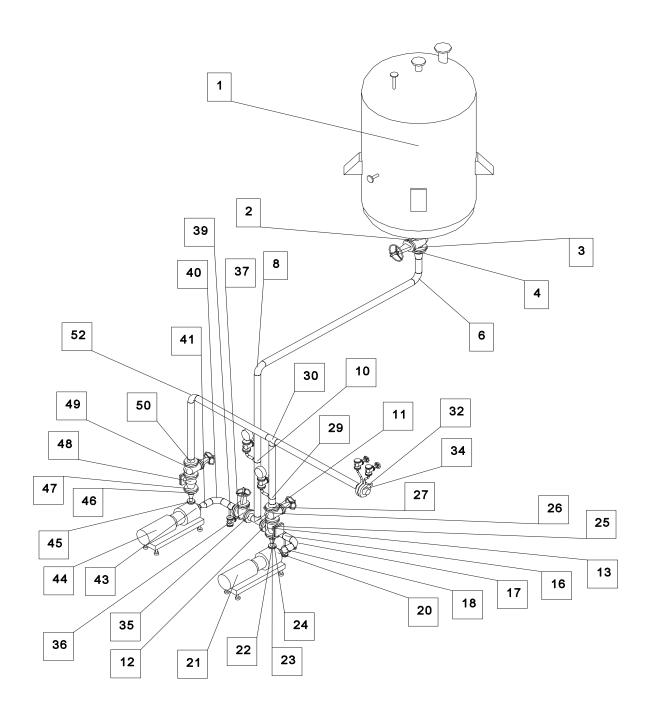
Modified Piping Arrangement - Perspective View
